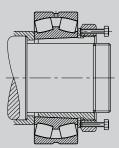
Dismounting of Withdrawal Sleeve by using Bolts
